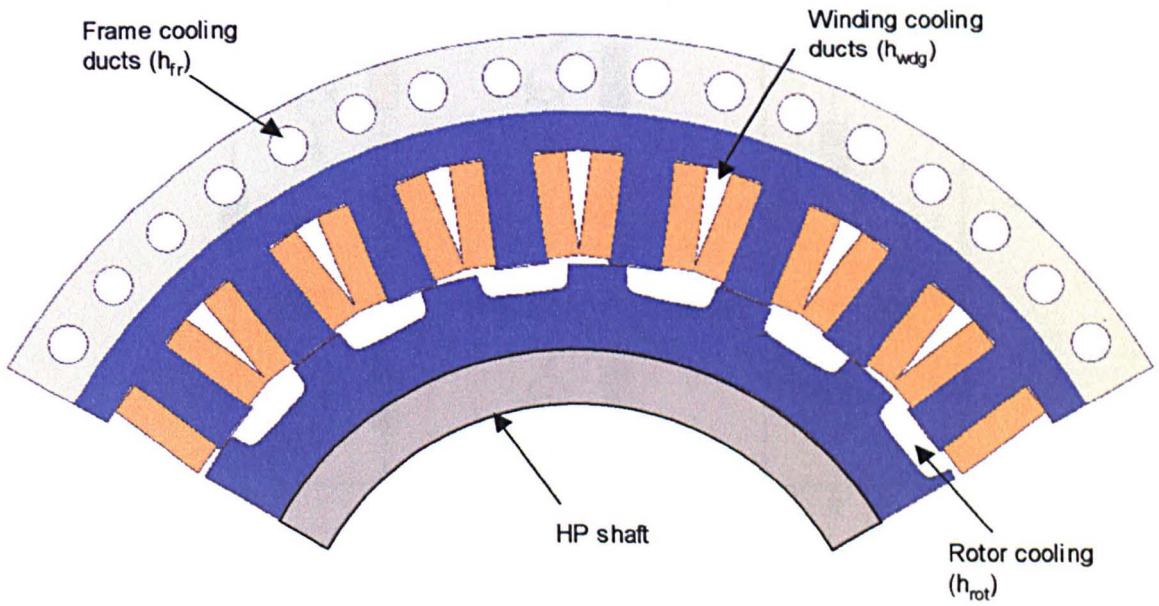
Machine cross-section showing the location of axial cooling ducts through the stator windings and frame.
